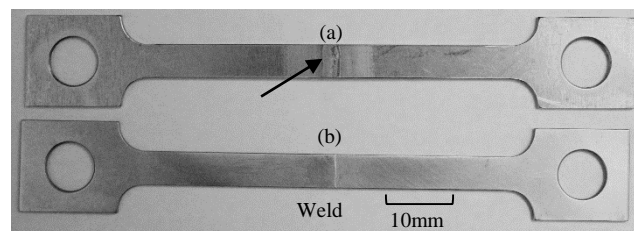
Machined samples : (a) sample with a weld in the center, (b) sample after polishing
